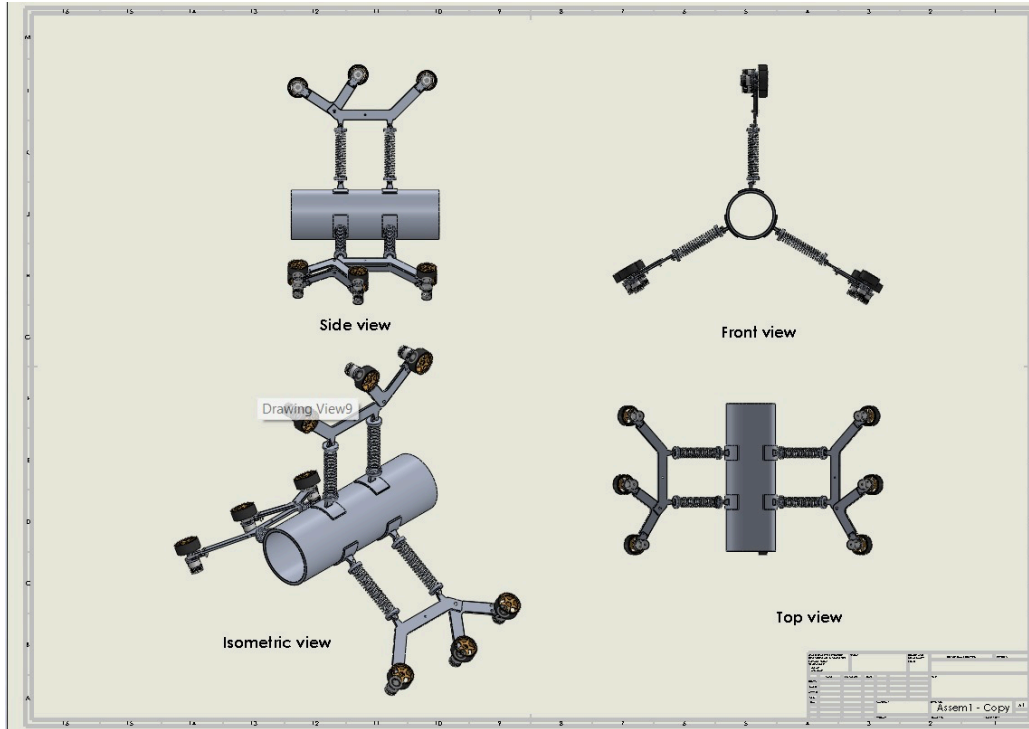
Orthographic views of the in-pipe inspection robot (side, front, top, and isometric views).
